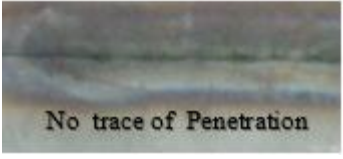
Macrostructure of FZ-TIG 2205 DSS weldments
